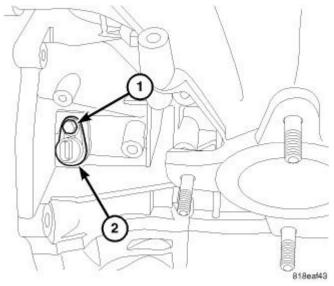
Crankshaft Position Sensor & Bolt Courtesy of CHRYSLER GROUP, LLC
